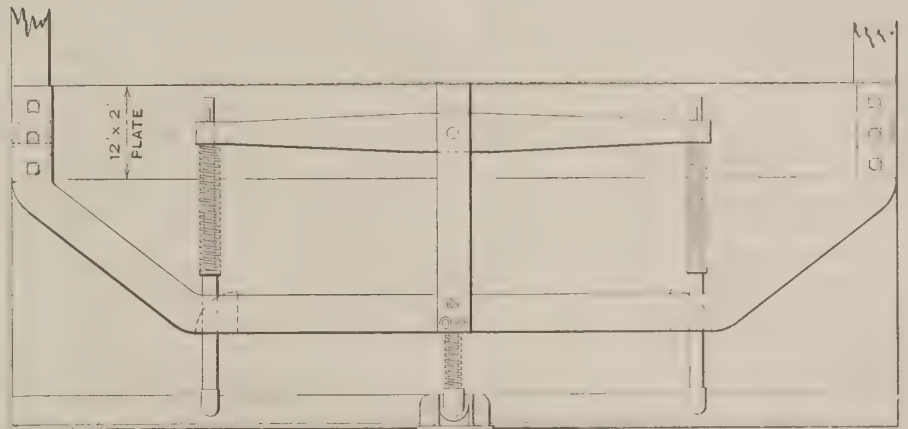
OVERHEAD BUFFER ARRANGEMENT.
